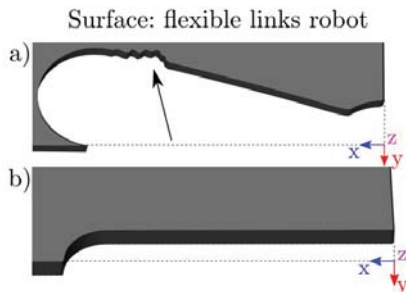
Machined surface: robot with flexible links - a) without spring (unstable case) - b) with spring (stable case)
